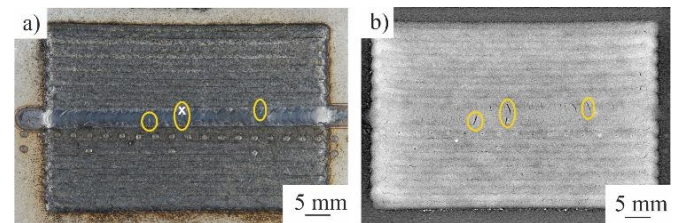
(a) Photograph of LMD-coating after being subjected to CTW-test; (b) X-Ray image of the LMD-coated specimen after CTW-test (SEM-position marked with a cross)
